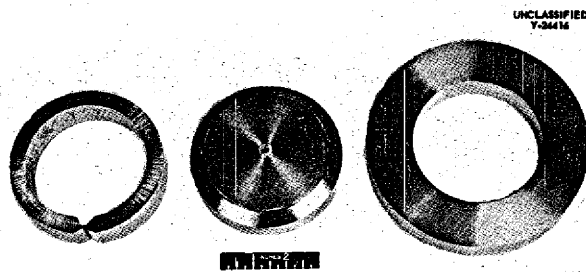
Pump Fabrication Test Components Prior to Welding.
